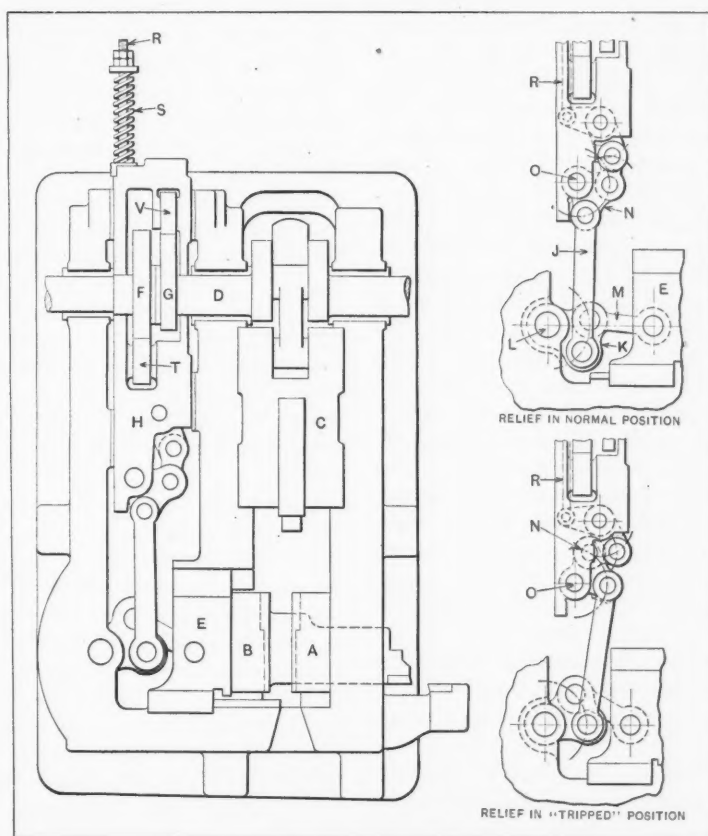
Plan and Detail Views of Forging Machine showing Automatic Relief or Tripping Mechanism
